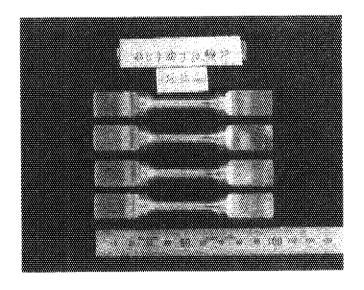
Appearance of specimen before torsion fatigue test(Nb1%Zr/SS304 joint).
